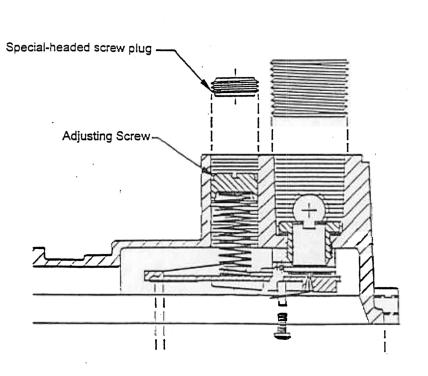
SPECIAL-HEADED SCREW-IN PLUG
